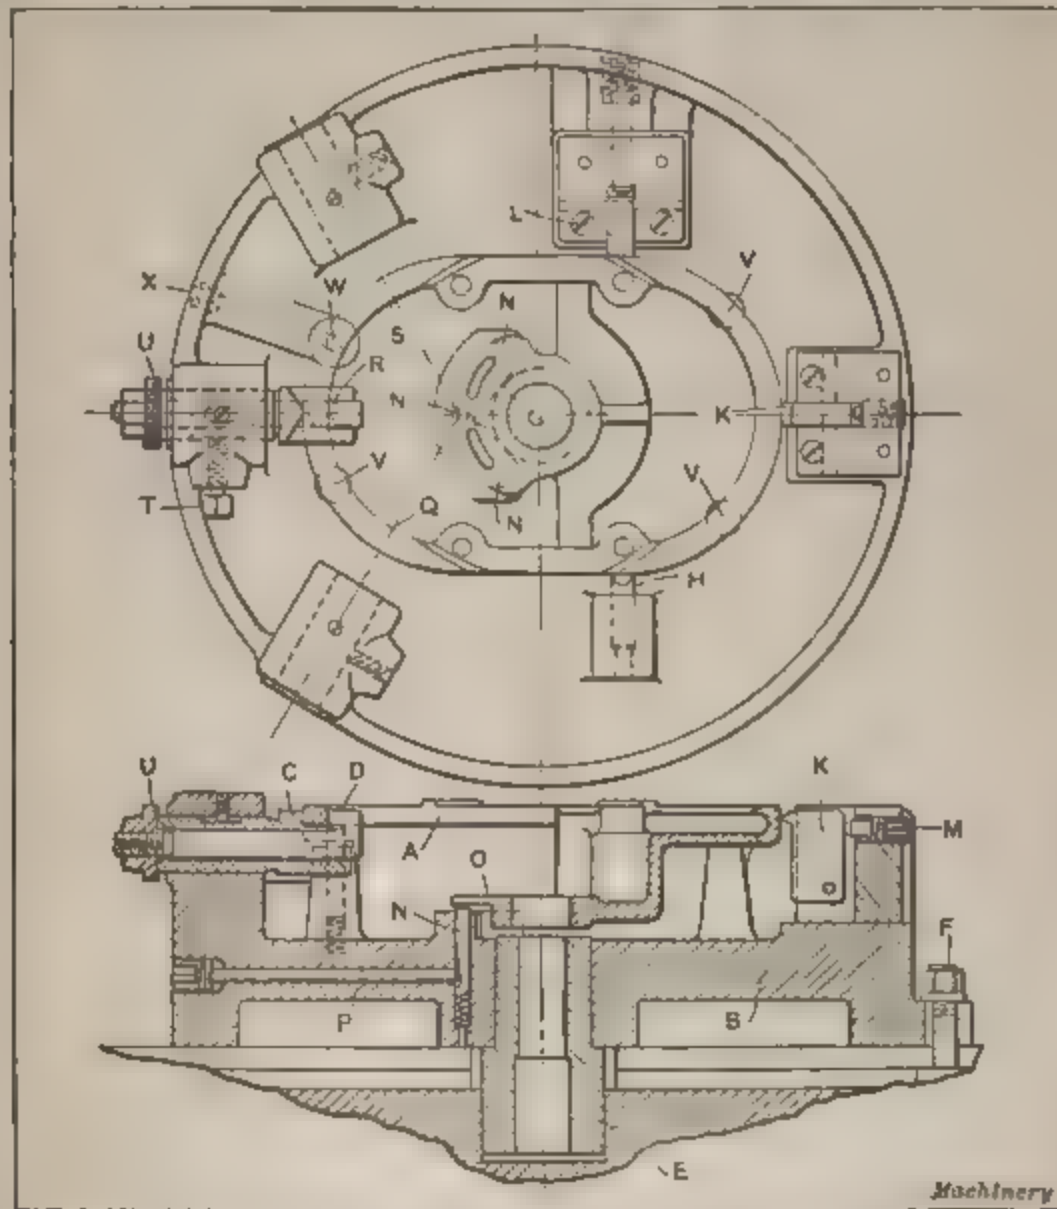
Ingenious Chucking Device for holding Odd-shaped Aluminum Casting without Distortion
